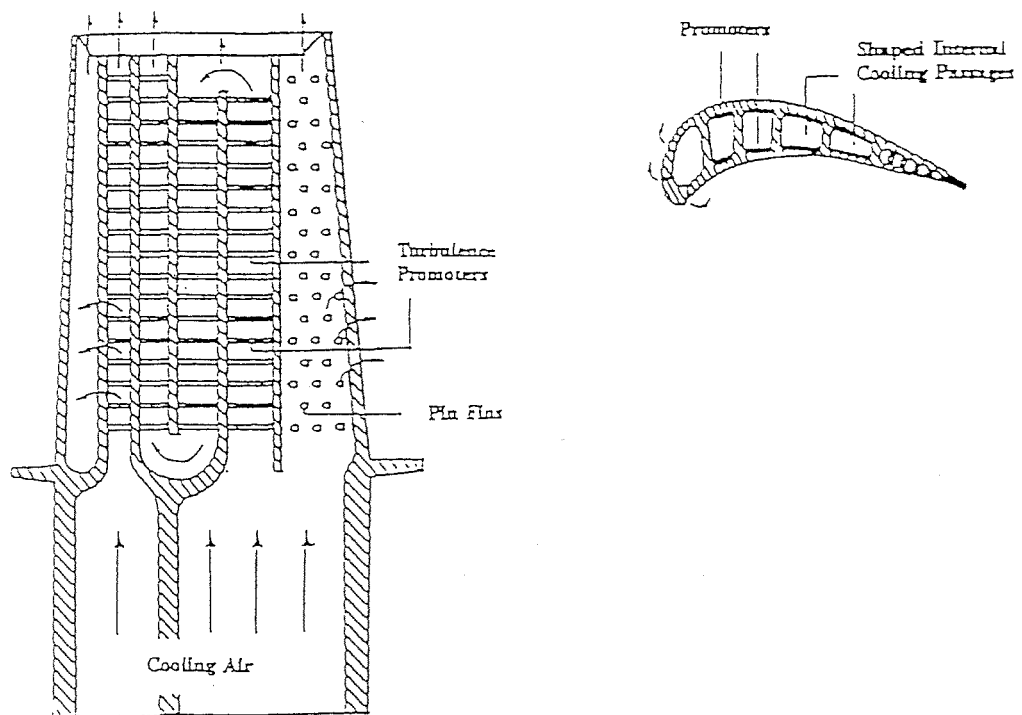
Cutaway view of an advanced gas turbine blade.
